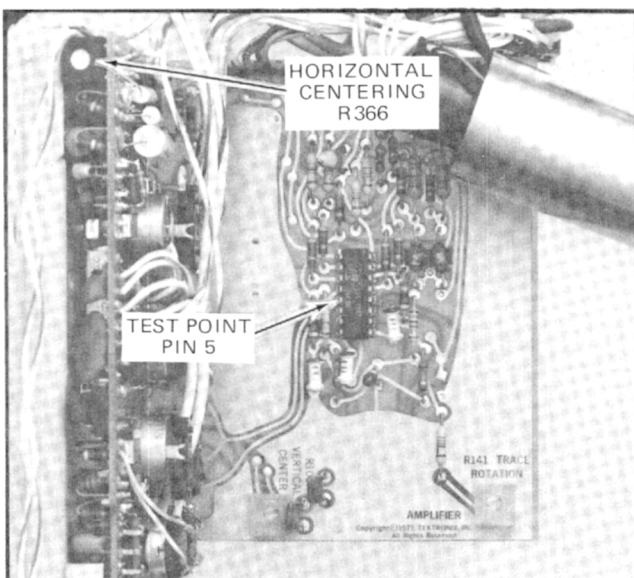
Location of Horizontal Centering adjustment and test point.
